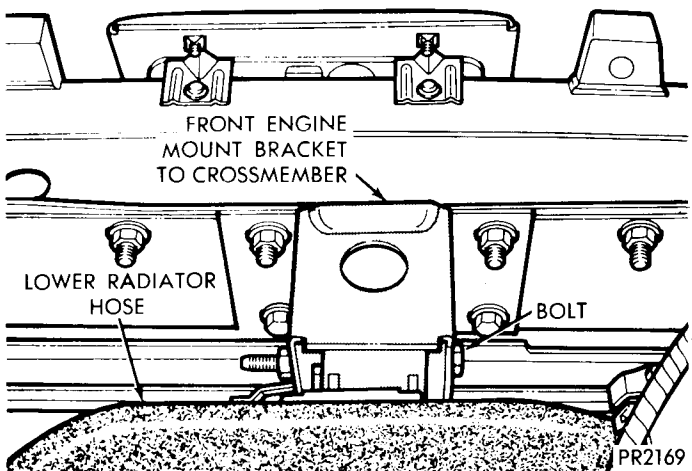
Remove or Install Engine Mount Bracket from Front Crossmember
